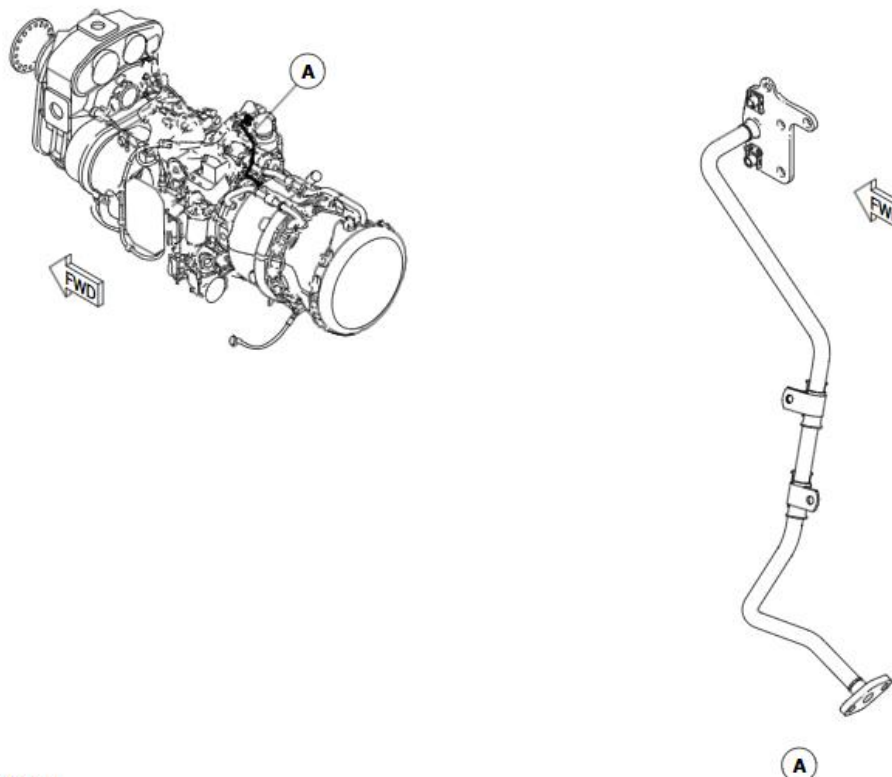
P3 Transducer to Gas Generator Case Air Tube
